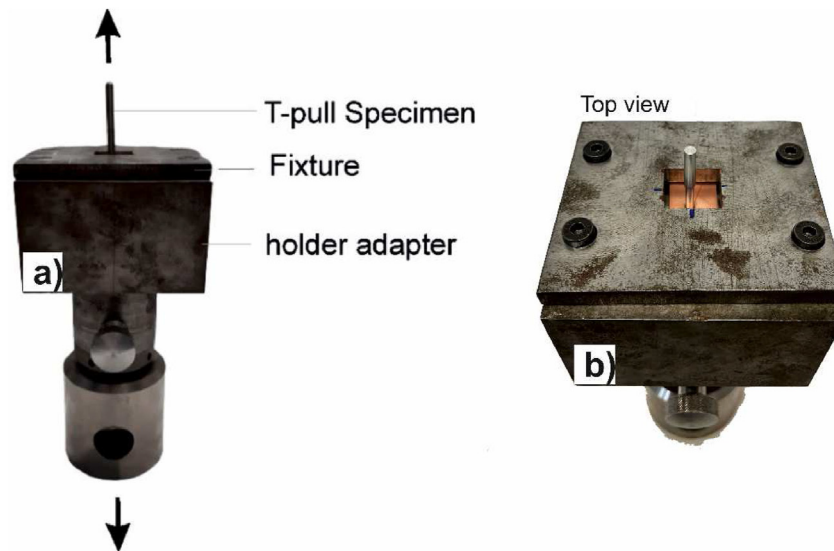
a) Pullout tensile testing holder adapter used for the evaluation of the ultimate tensile force of joints produced by Friction Riveting, including the top view (b).
